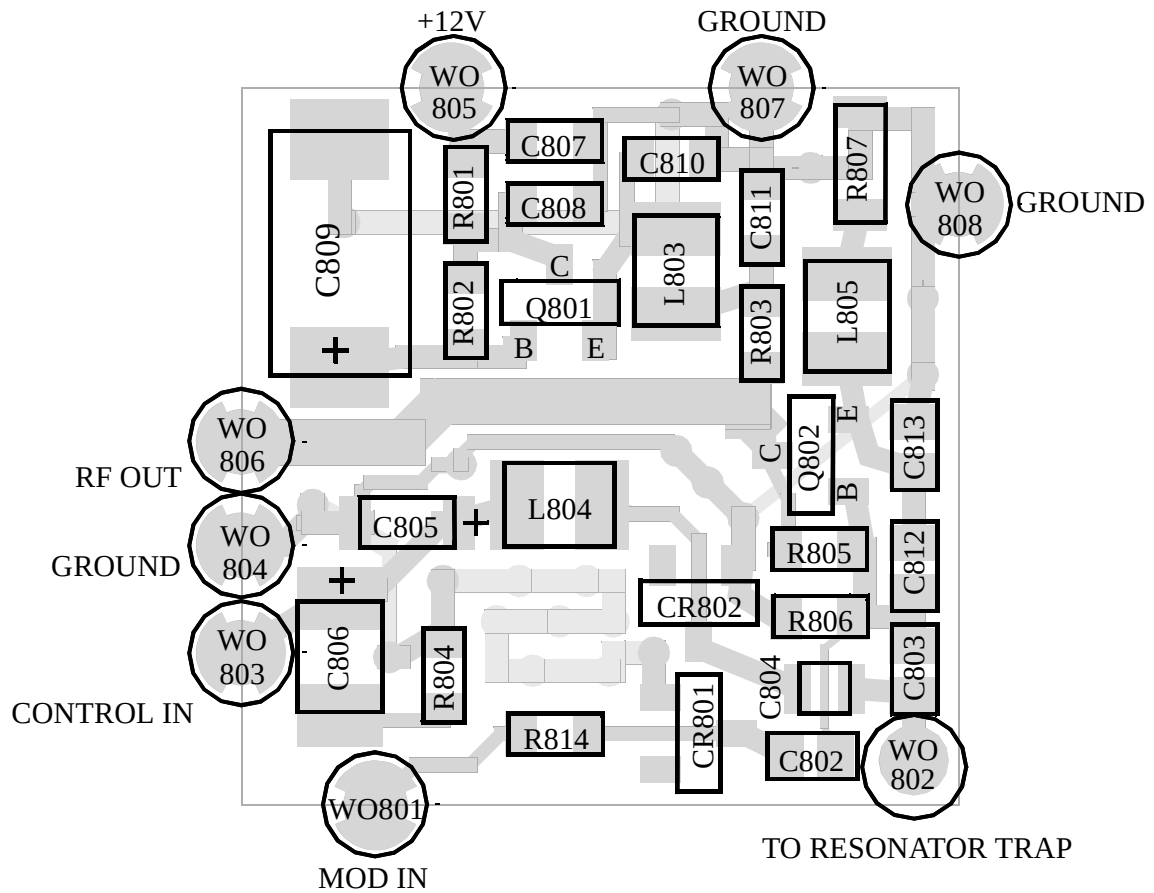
RECEIVE VCO COMPONENT LAYOUT
